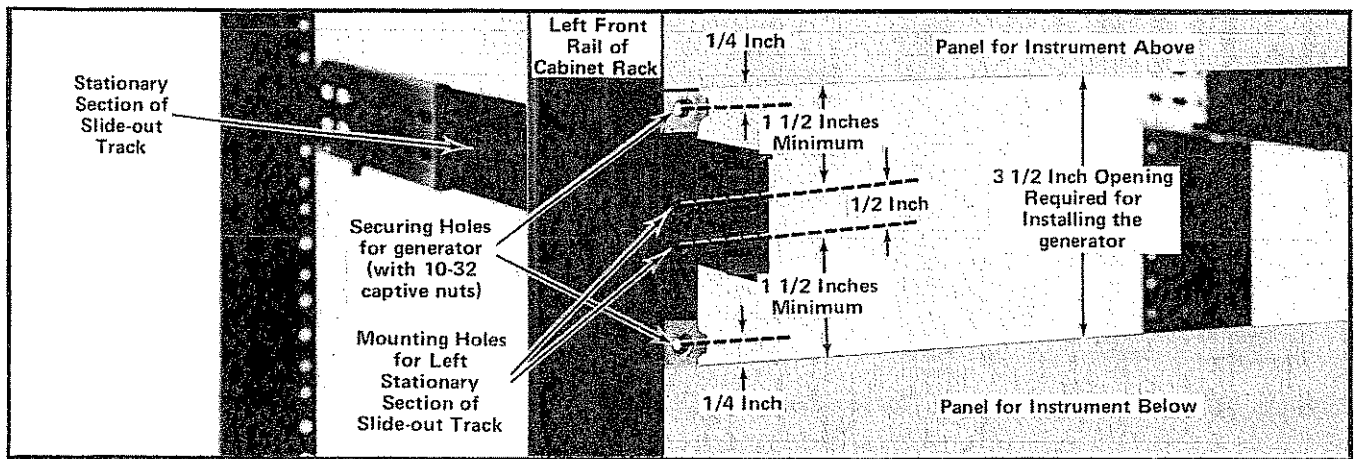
Vertical mounting position of the left stationary section and location of the securing holes. These same dimensions apply to the right front rail.
